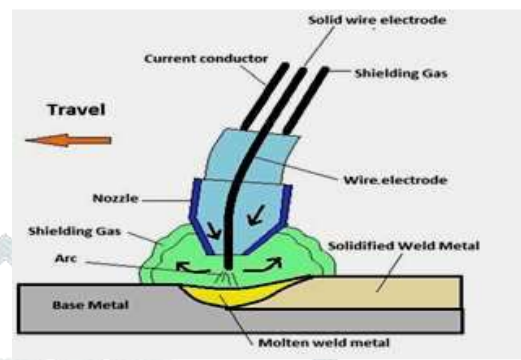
MIG WELDING WORKING PRINCIPLE
